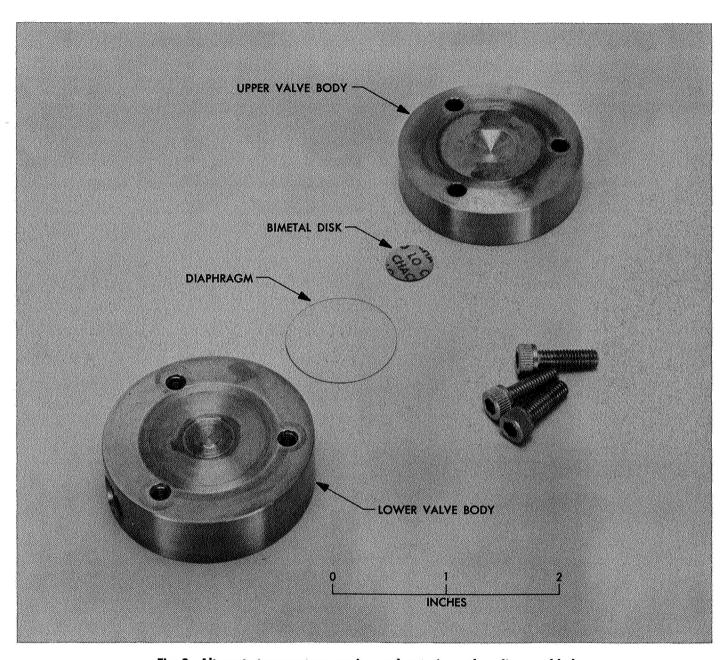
Alternate temperature sensing and metering valve, disassembled
